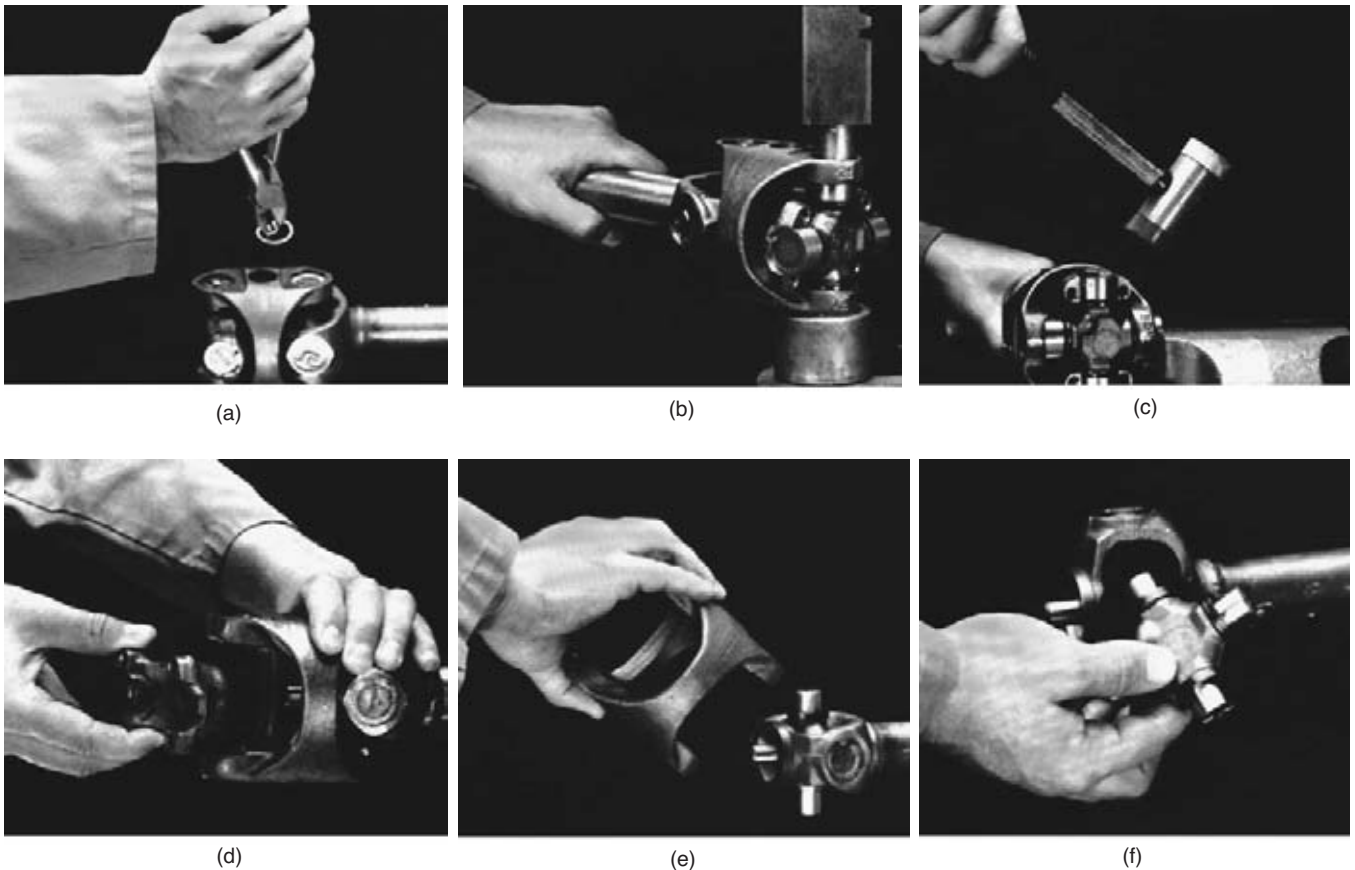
Disassembly of a double-Cardan CV joint begins with placing alignment marks on the coupling yoke and the two end yokes. The snap rings are removed (a); the bearing cups are pressed out (b) and removed (c); one cross and the socket yoke are removed (d); steps a and b are repeated to remove the coupling yoke (e) and the second cross (f). (Courtesy of Dana Corporation)
